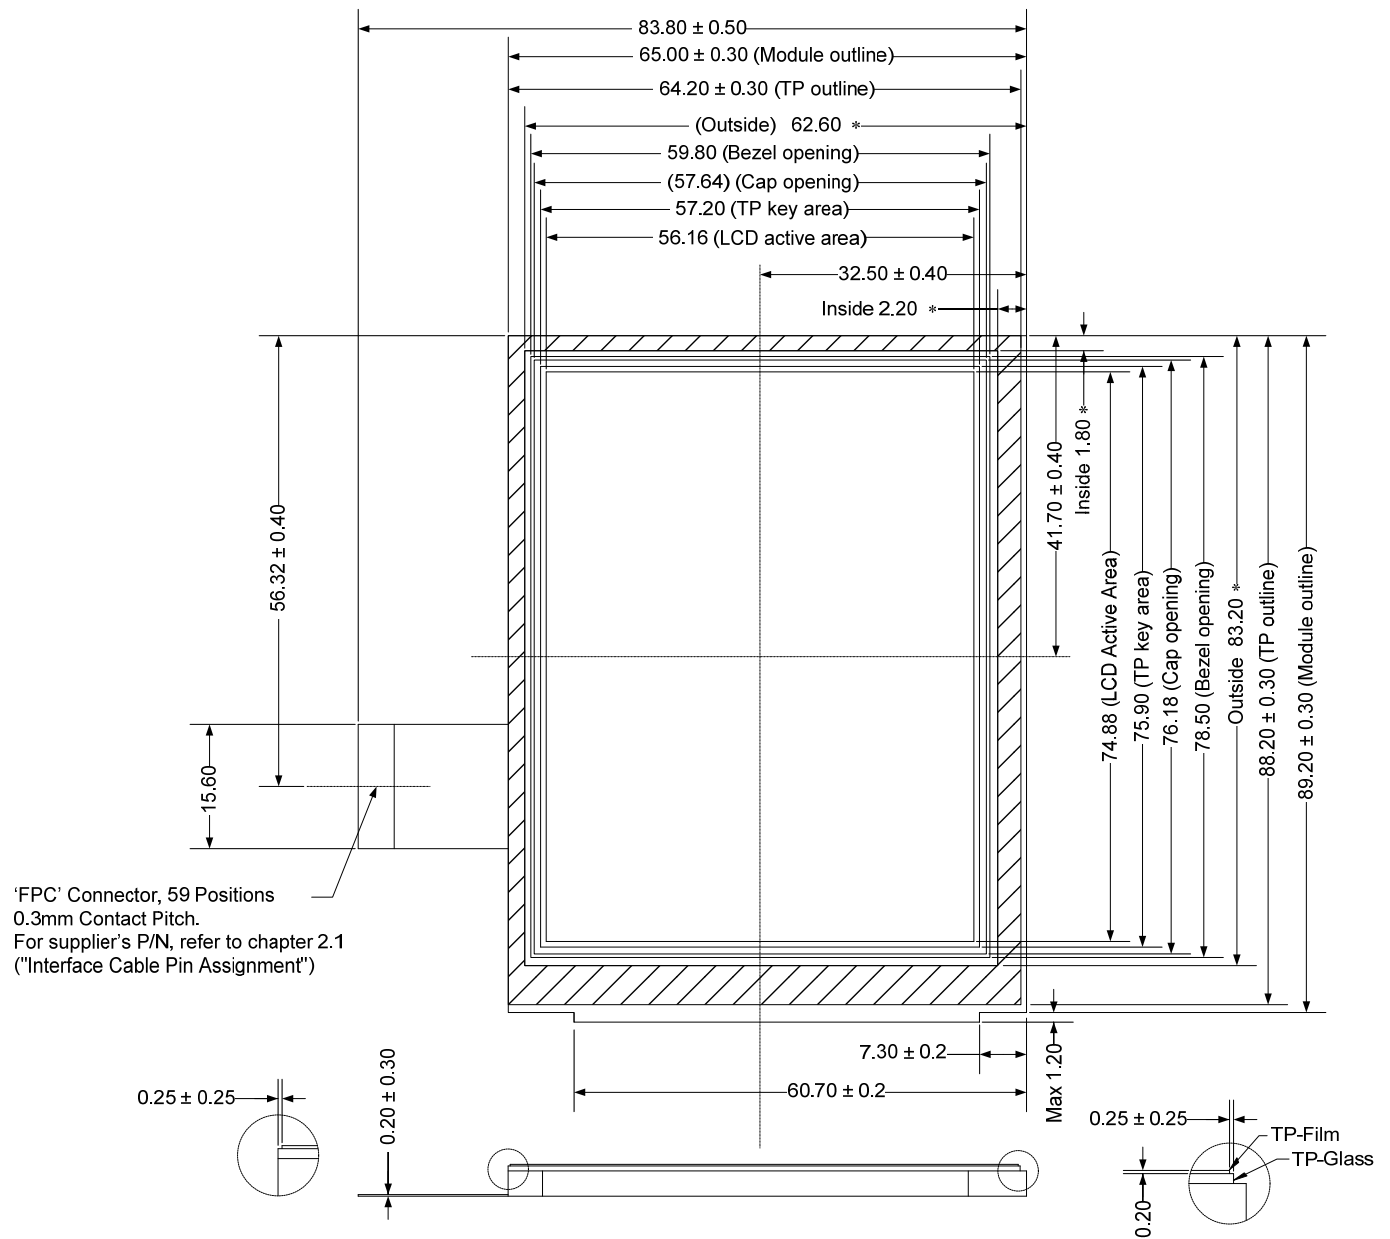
3.7-inch Mechanical Outline (Front View)
